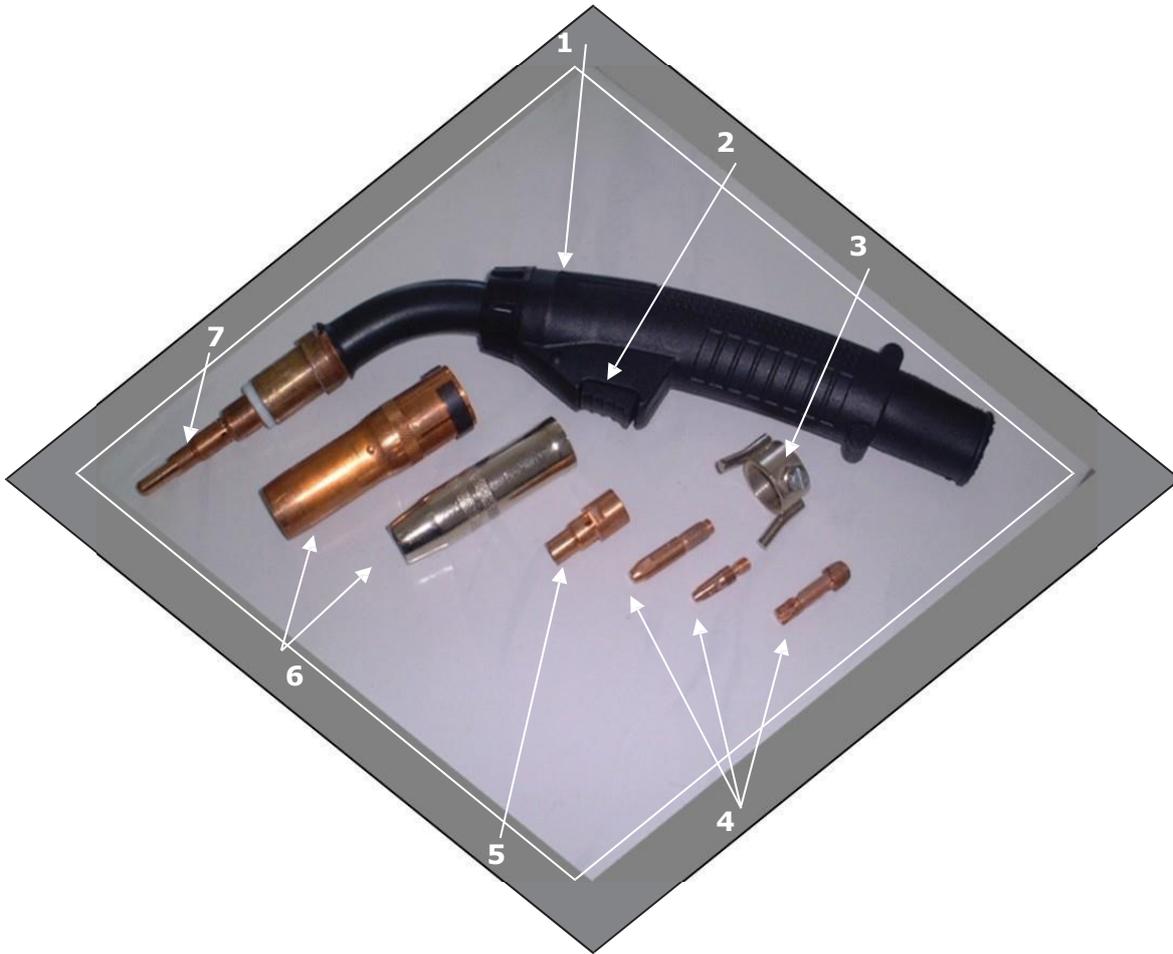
Torch body; 2 On/off or latching switch; 3 Spot welding spacer attachment; 4 Contact tips; 5 Gas diffuser; 6 Gas shrouds; 7 Torch head assembly (minus the shroud). Source: TWI
